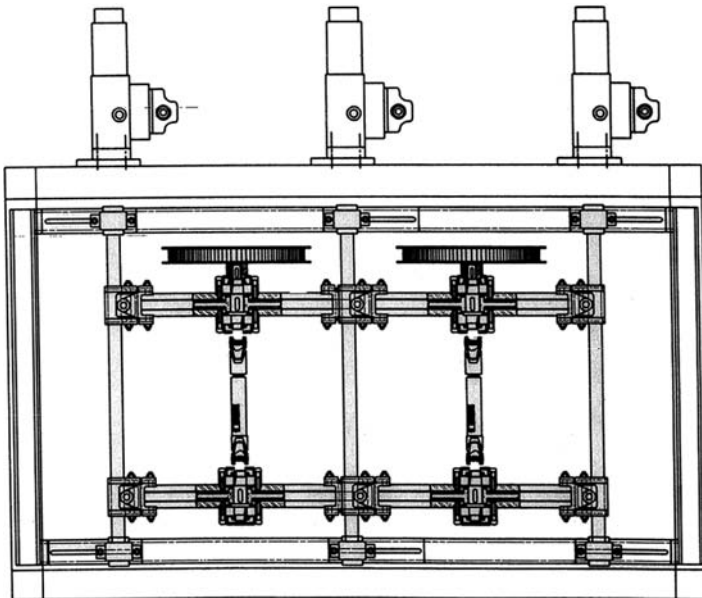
Plan view drawing of the roller rig at MMU.
